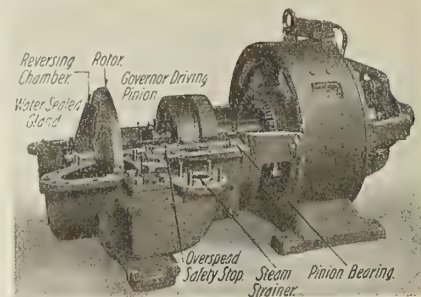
Geared Turbine Unit with Upper Casing Removed
